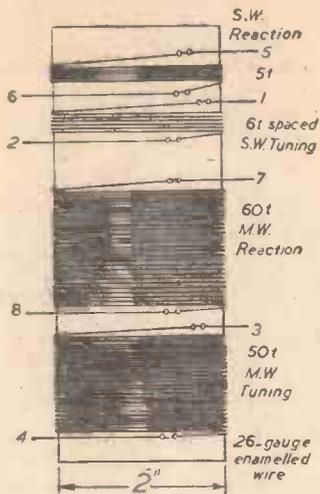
Details of a suitable short and medium-wave coil shown approximately to scale, assuming the use of 26-gauge enamelled wire. The length of the former should be about 5in., or 6in. if 24-gauge wire is used.
